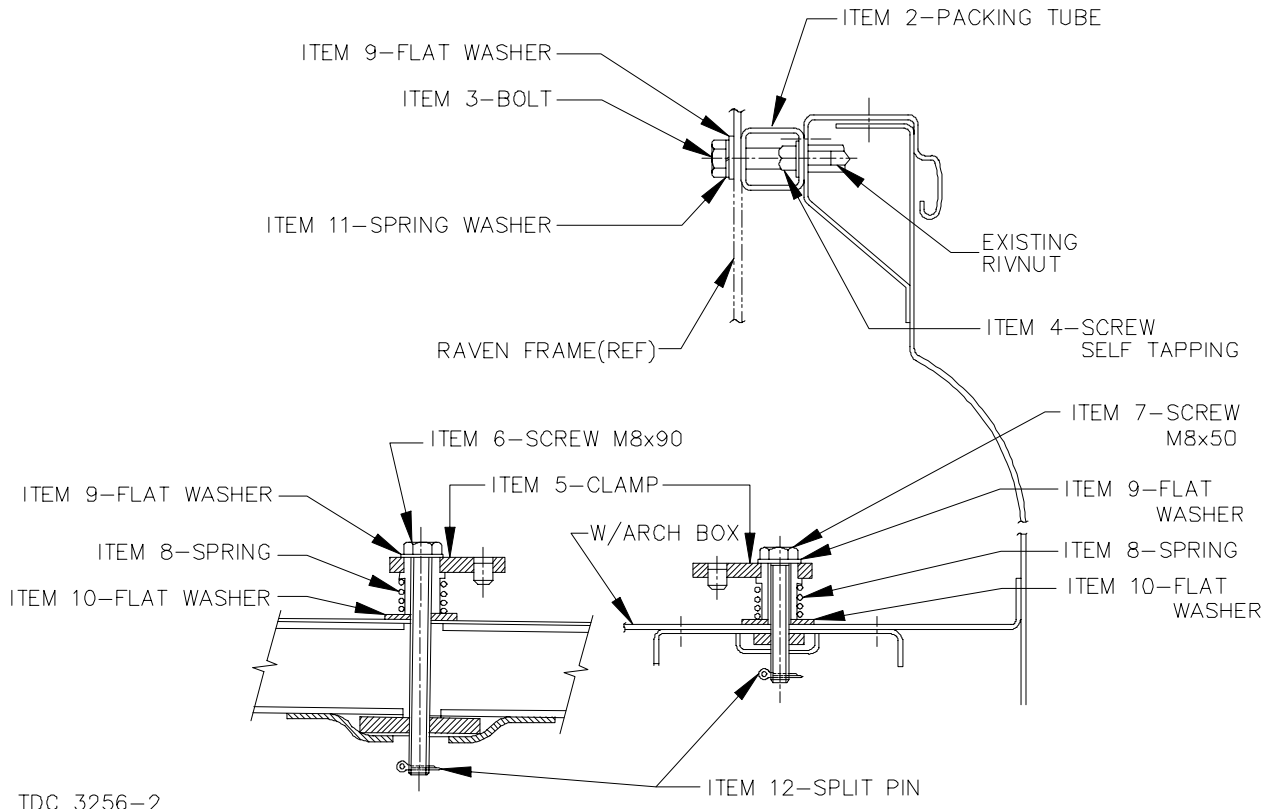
Packing Tube and Lower Clamp Installation (Right-hand Side Only)
